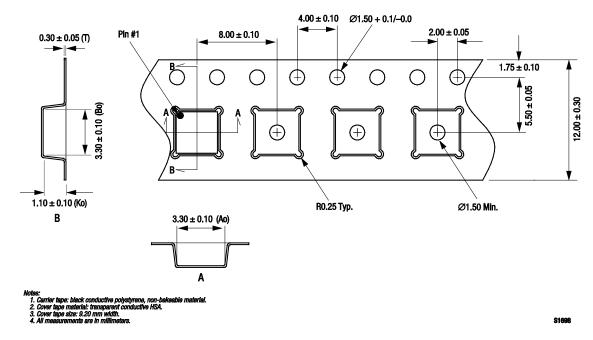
SKY12146-321LF Tape and Reel Dimensions
